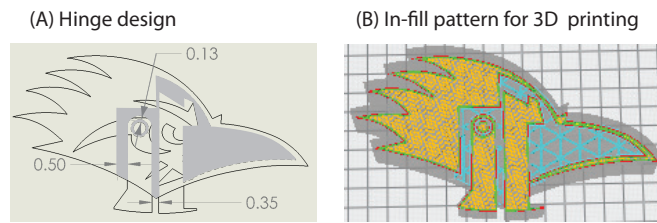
Sectional view of the design. (A) Hinge design with tolerances. All dimensions are in cm. Shaded areas represents hollow sections. (B) In-fill pattern created by CURA, the post processing software for the 3D printer.
